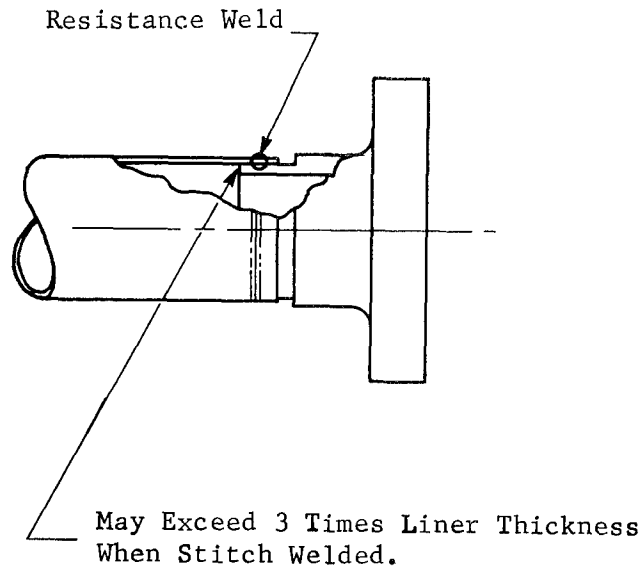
Resistance Welding Fitting to Liner Using Stitch Welder
